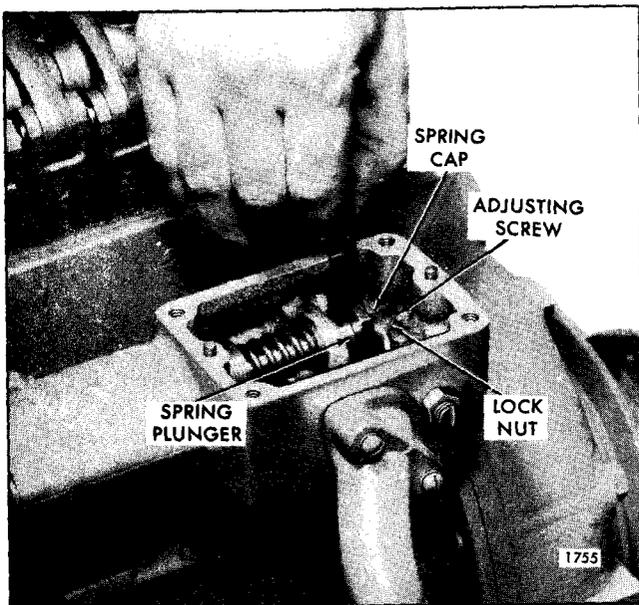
Adjusting Gap (Single Weight Governor) using Tool J 5407
